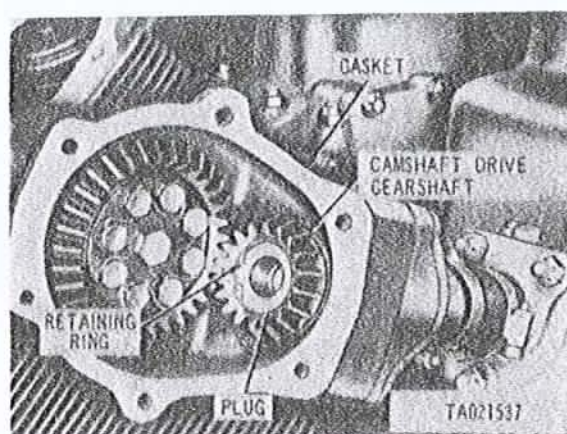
Removing or installing camshaft drive gearshaft oil transfer plug retaining ring.
